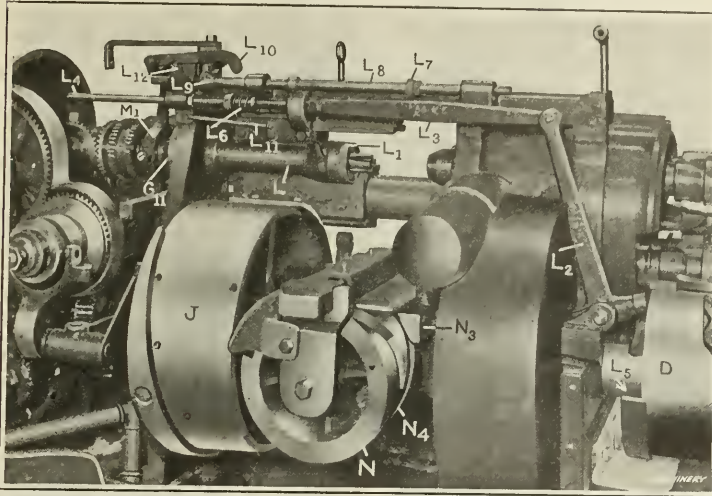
Arrangement of Die Mechanism for Right-hand Threading on Gridley Automatic
